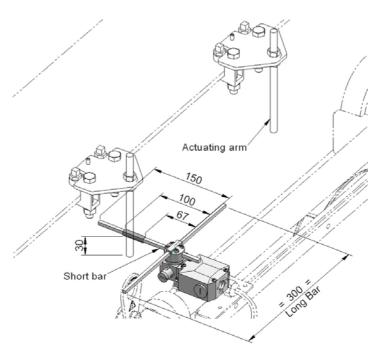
Setting the Traverse Limit - Single Girder Arrangement
